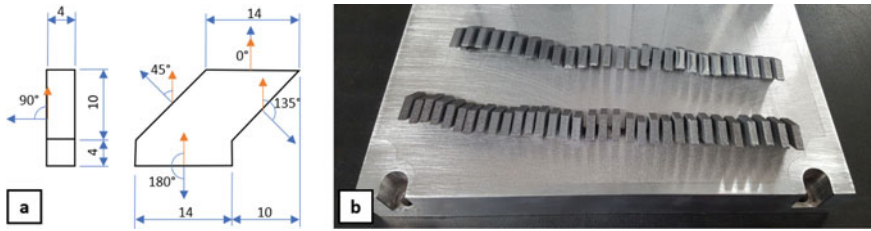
Designed specimen (a) and fabricated specimens (b)
